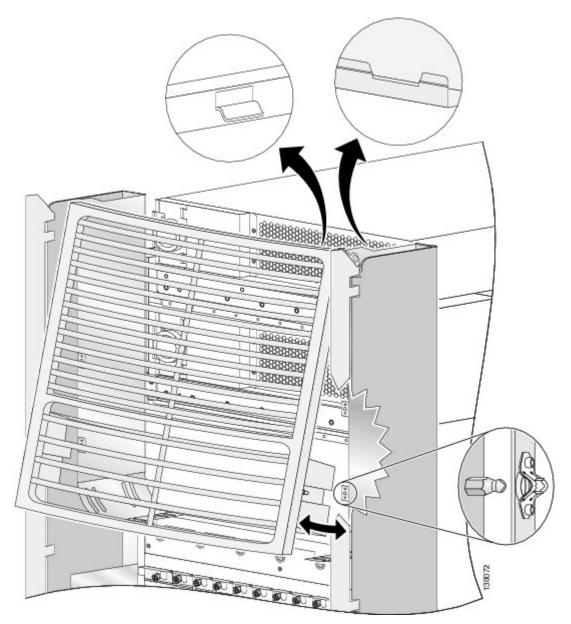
Removing the Rear (OIM) Side Lower Bezel
